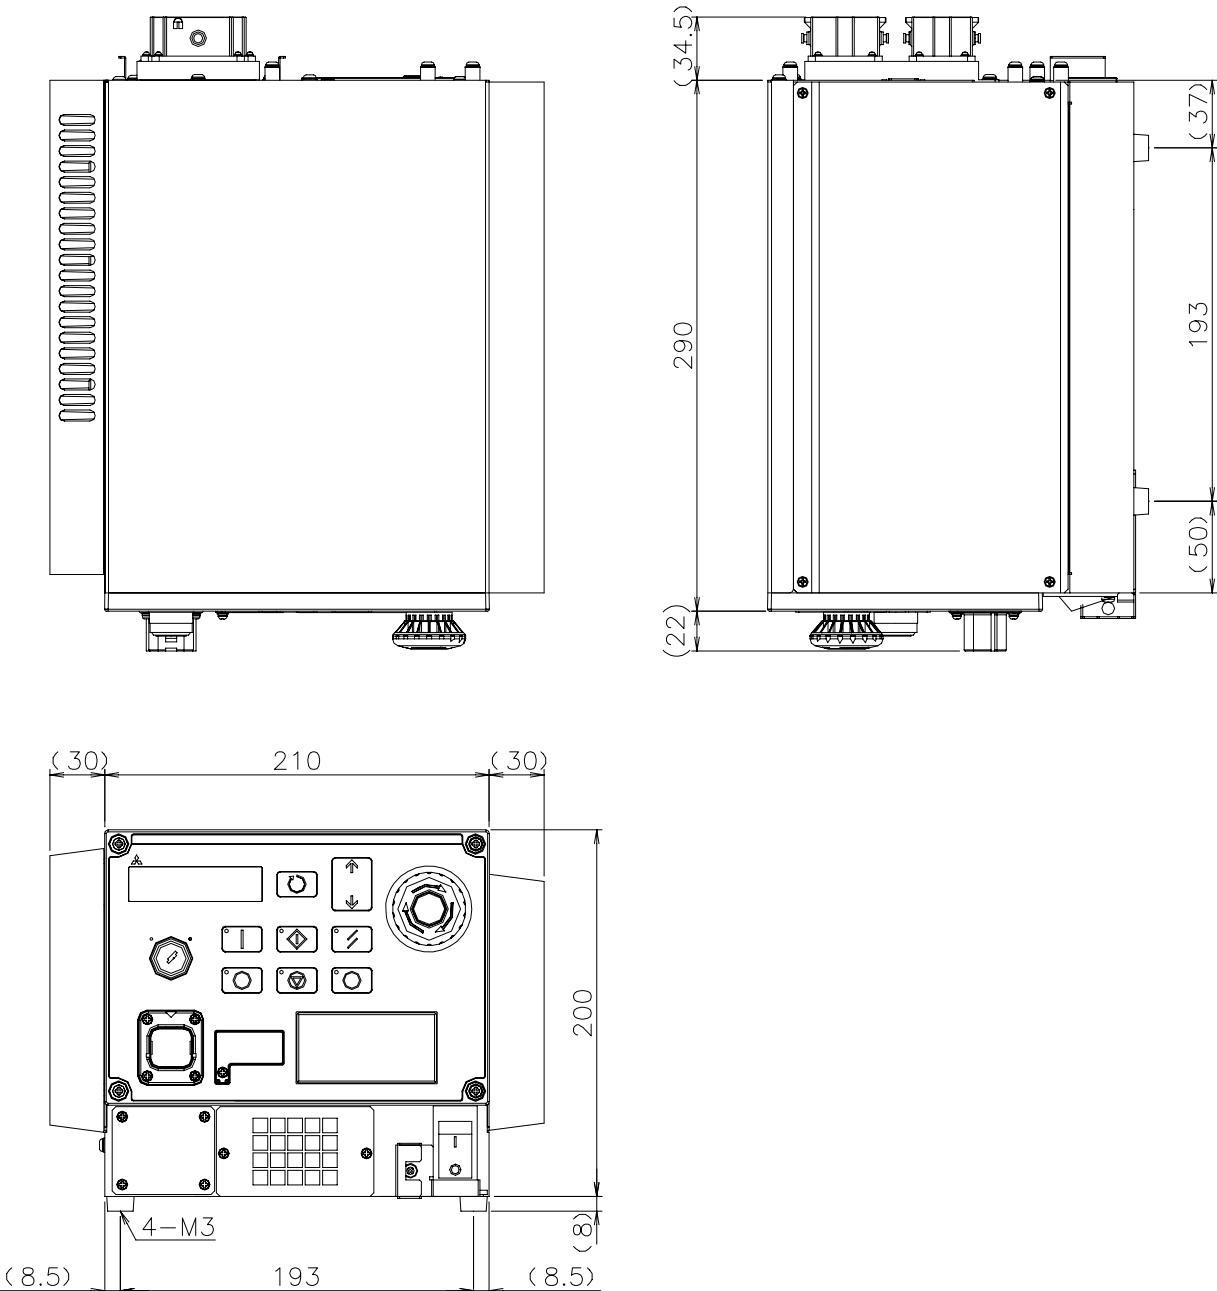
Outside dimensions of controller (DU1A-771-S15)
